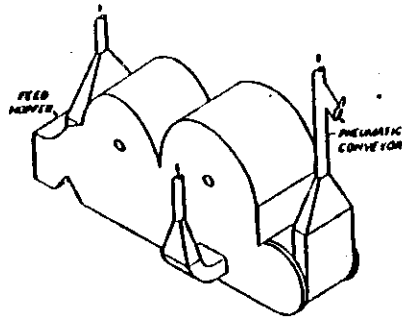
SCHEMATIC DRAWING OF EXHAUST SYSTEM USED WITH PICKER MACHINE.
